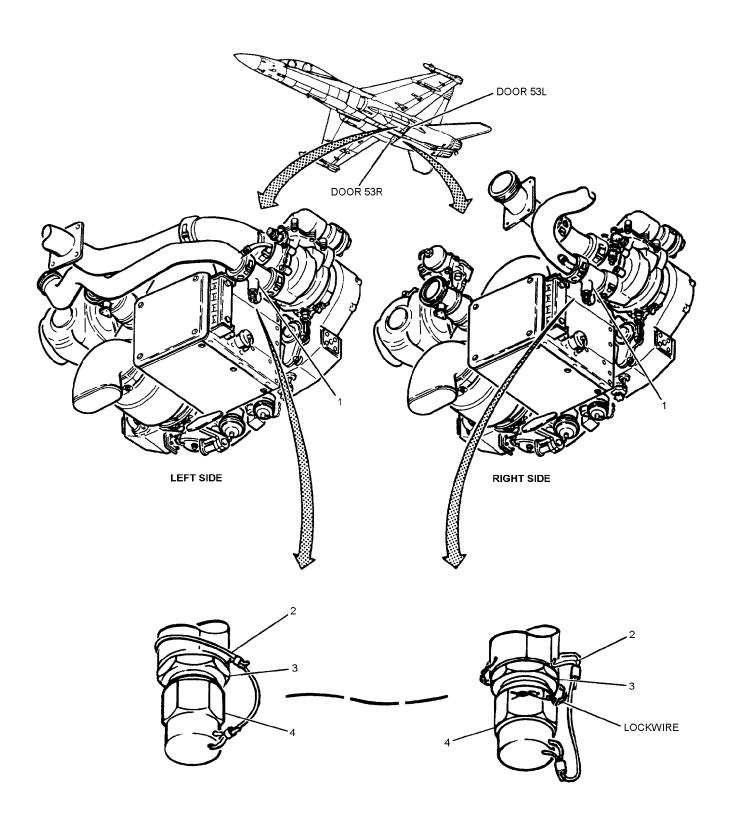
Engine Fuel Shutoff Valve Leak Test (Sheet 3)
